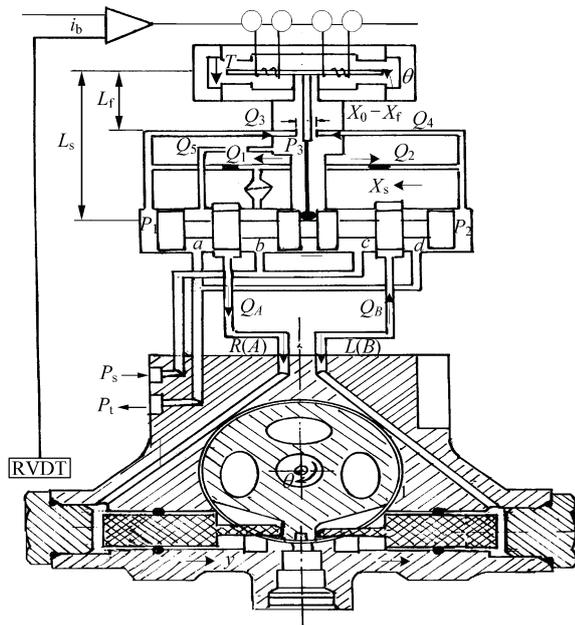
Cross-section of the rotary actuator and the two-stage servo-valve with mechanical feed-backs.
